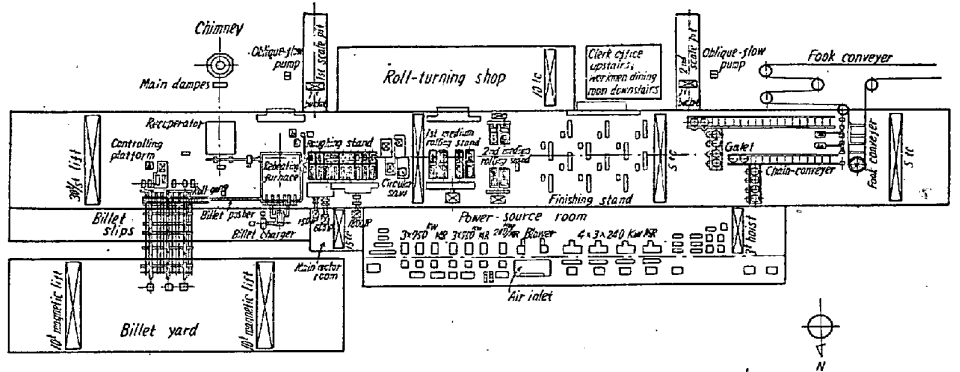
Layout of machineries in the Hikari wire-rod mill (Yawata Iron & Steel Co.)
